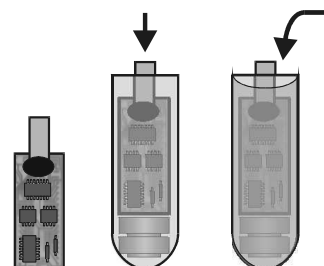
Packaging scheme. The sensor chip is mounted on the PCB and the wire-bonds are glob-topped. The PCB and batteries are connected and put in a tube. The tube is filled with glue (potted) covering the system while leaving one end of the sensor chip exposed.
